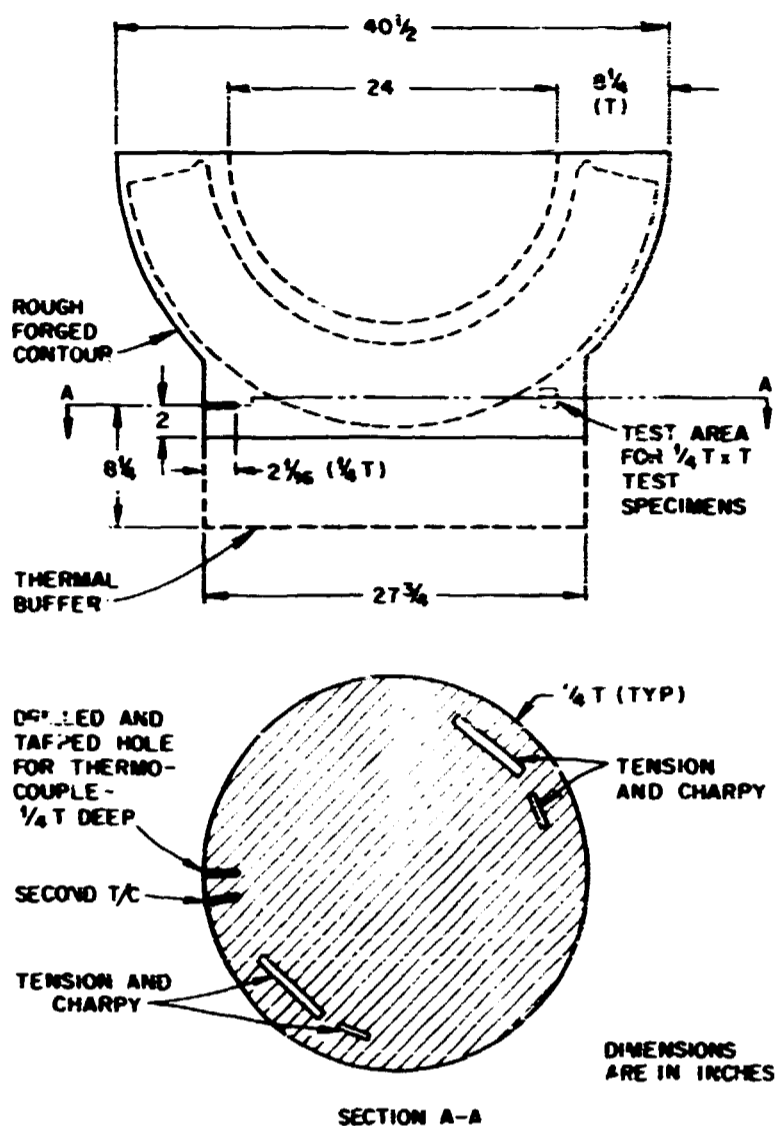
Completed rough forging of a hemispherical head for the intermediate test vessels.
